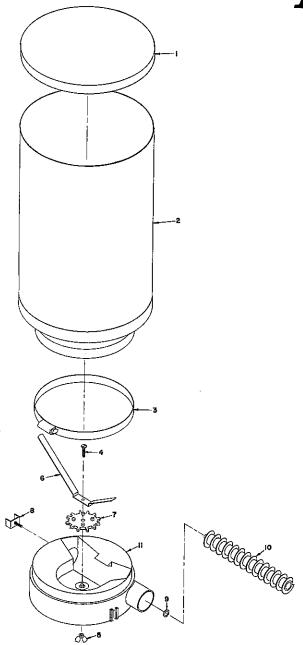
CHOCOLATE CANISTER ASSEMBLY COMPLETE
